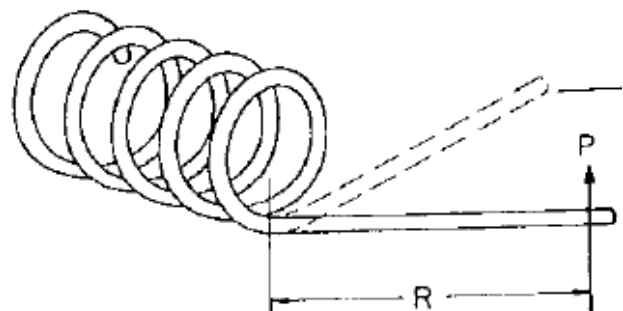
Typical way of loading helical torsion spring stress will be flexural against helical tension/compression spring in which main stress will be shear. Typical way of loading helical torsion spring is shown in Fig. 2.
